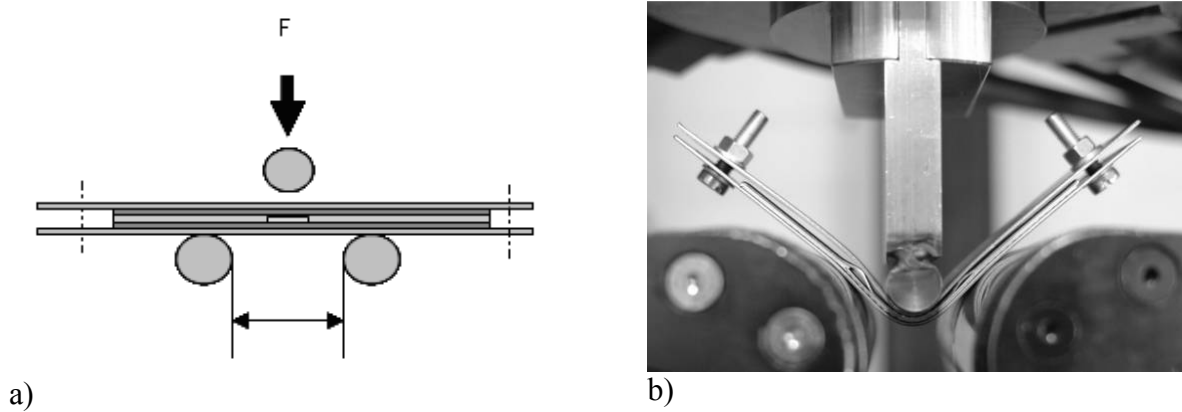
Support device for sandwich bending process: Sketch of supporting steel sheets 150×40×1 mm with clamped sandwich samples 100×36×1.6 mm (a) and a photo of the arrangement for three-point bending (b)
